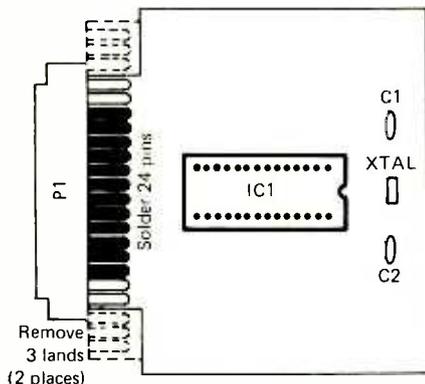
Assembly details of the speech-processor board with the User Port connector.
